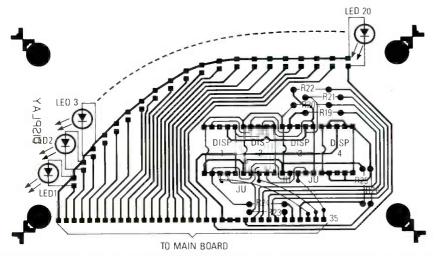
STUFF THE DISPLAY BOARD as shown here. The flat side of each LED should point toward the bottom of the board. The two boards are sandwiched together, and corresponding pads on the boards are connected with short pieces of stiff wire.
